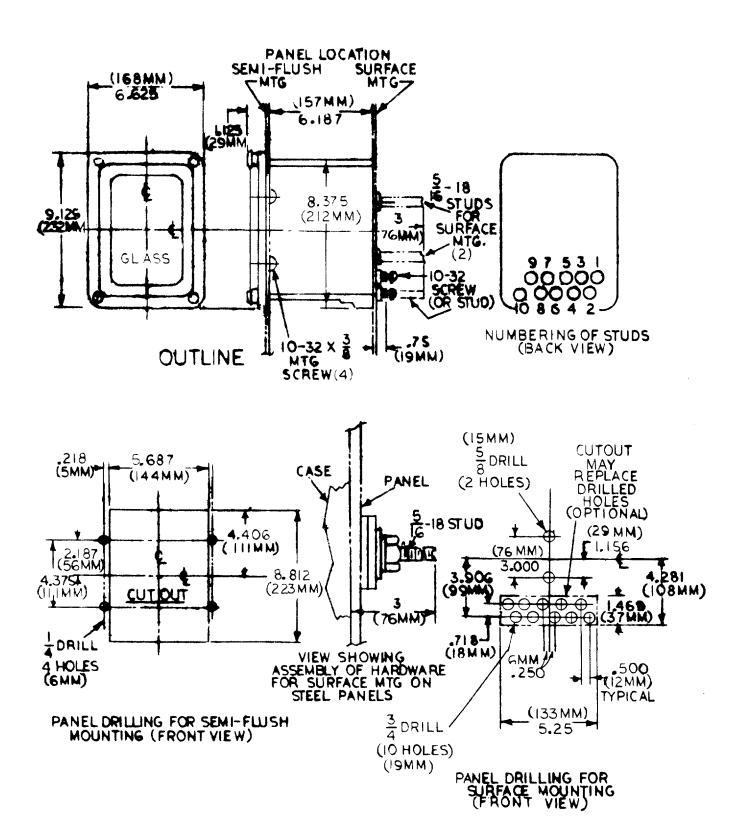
(K-6209271-6). Outline and Panel Drilling Dimensions for NSR21H Relay.
